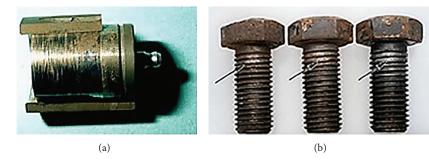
(a) Fretting corrosion at an axle-cylinder contact and (b) fretting wear on the threads of the caps crews [11].
